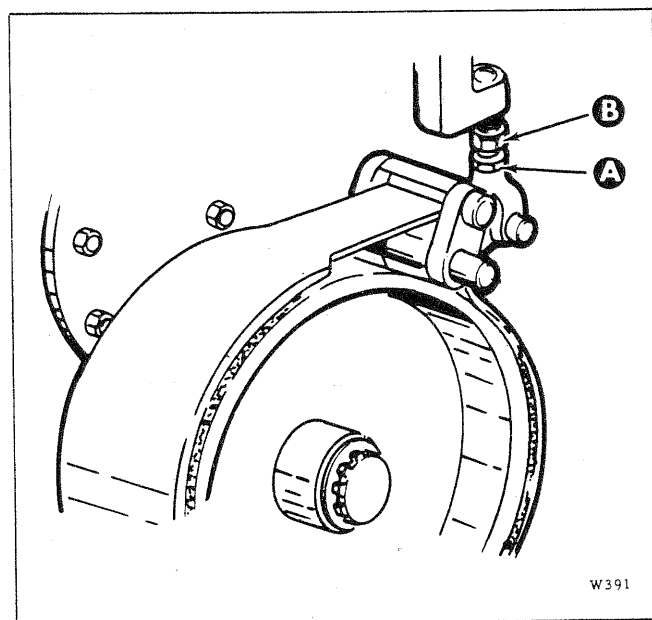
BRAKE BAND ADJUSTMENT DIAGRAM, DIRECT DRIVE WINCH
